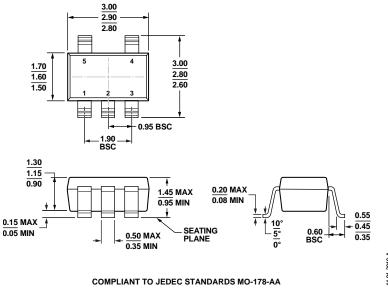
5-Lead Small Outline Transistor Package [SOT-23] (RJ-5) Dimensions shown in millimeters
